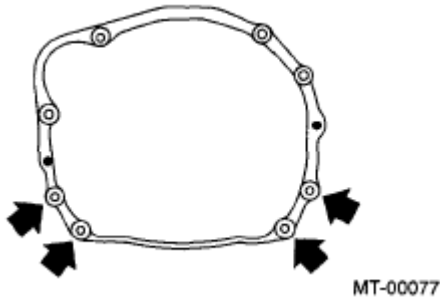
Locating Bolts And Nuts Which Hold Lower Side Of Transmission To Engine - MT Model
